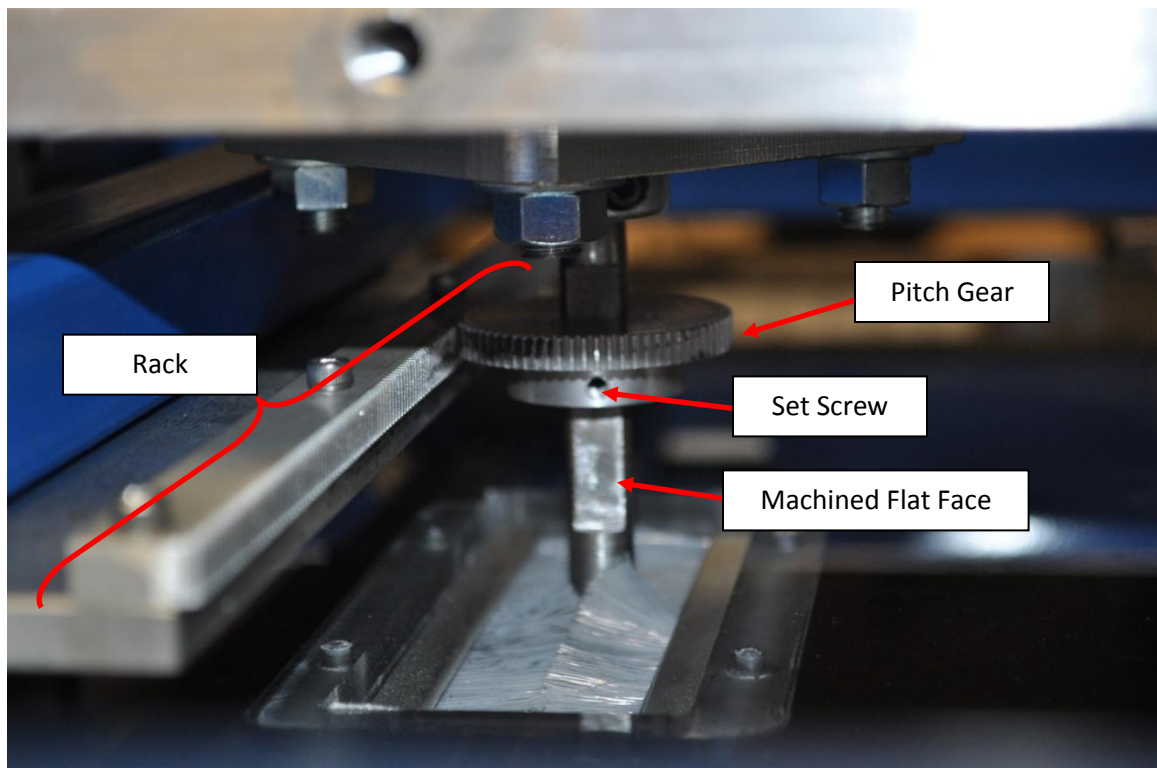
Pitch Gear Mounted on Airfoil Shaft
